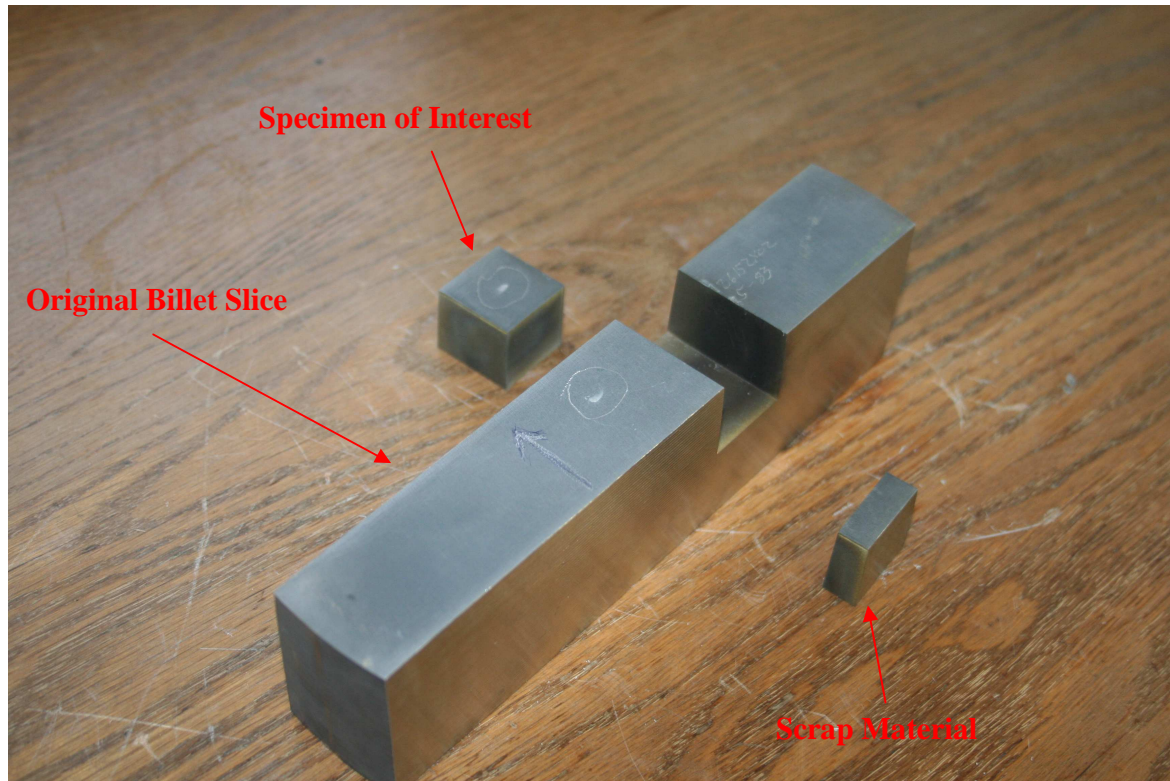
The original billet slice, which has had a specimen containing a dirty white spot sectioned out.
